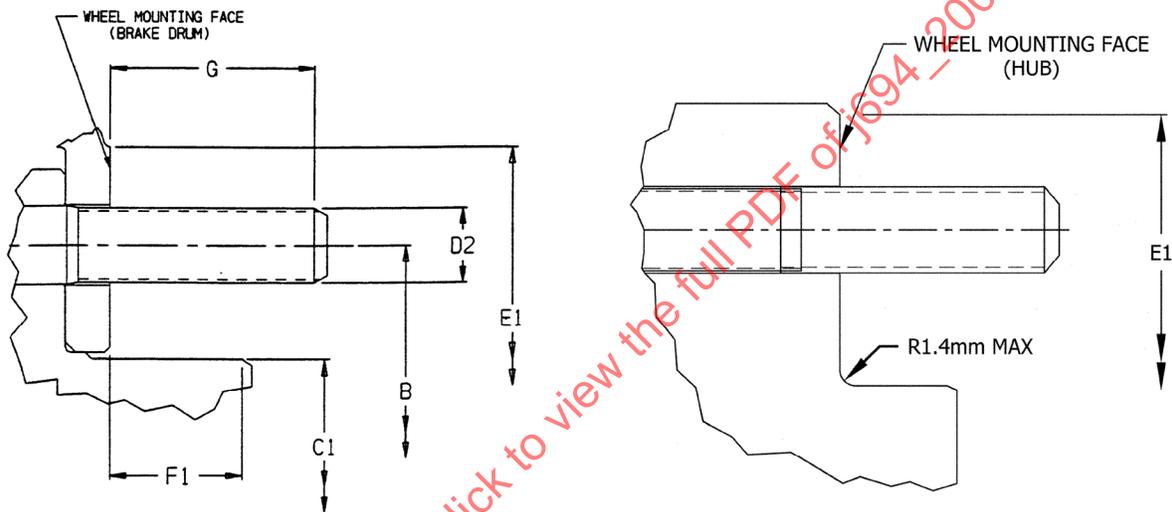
HUB OR DRUM INTERFACE DIMENSIONS
